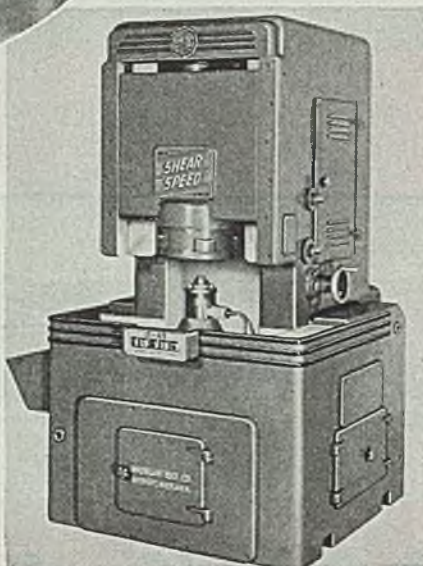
Shoulder gears such as the one shown here may be cut as fast as other types
